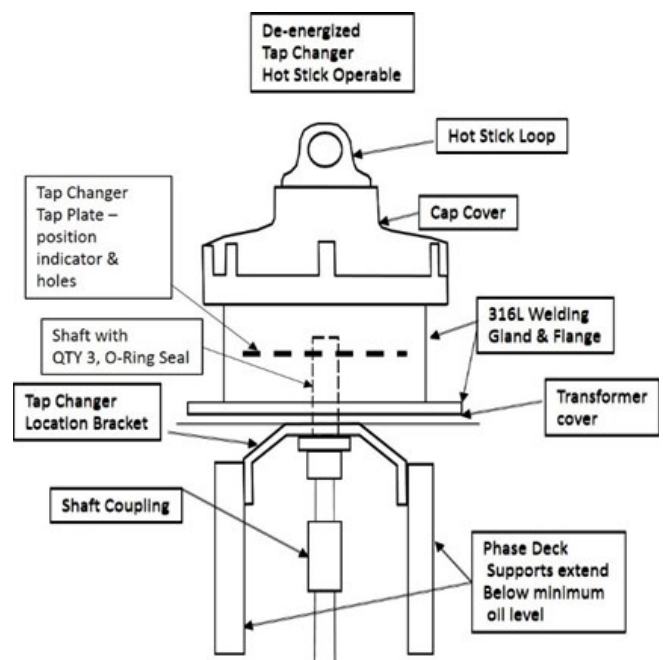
Outline of Tap-Changer Drive, Cover Mounted
